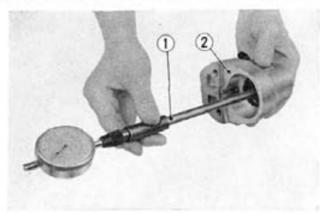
① Cylinder gauge ② Caliper cylinder
